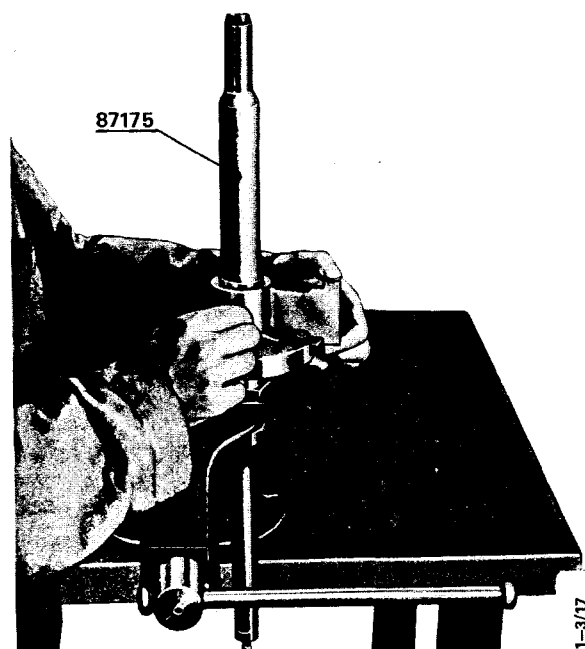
Adjust the cutting radius of the reamer with the aid of the setting tool
